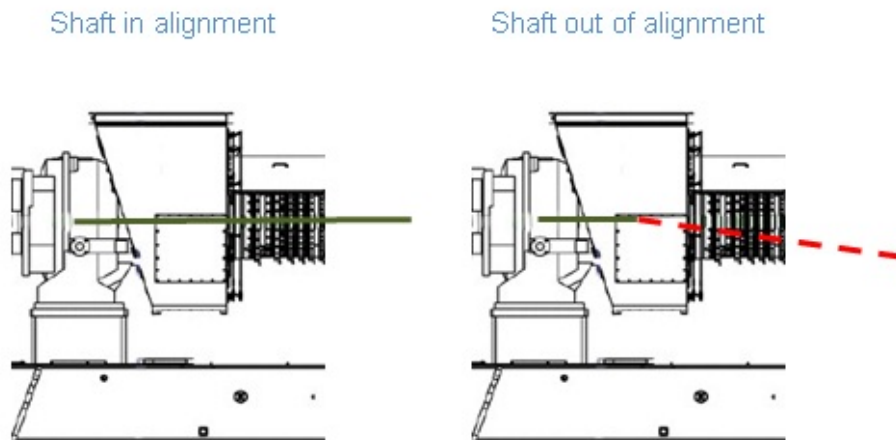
If the shaft is positioned to line up with the misaligned exhaust outlet (right), the dog-bone connection must be able to deal with the deflection. A team at Solar is currently looking into this problem.
